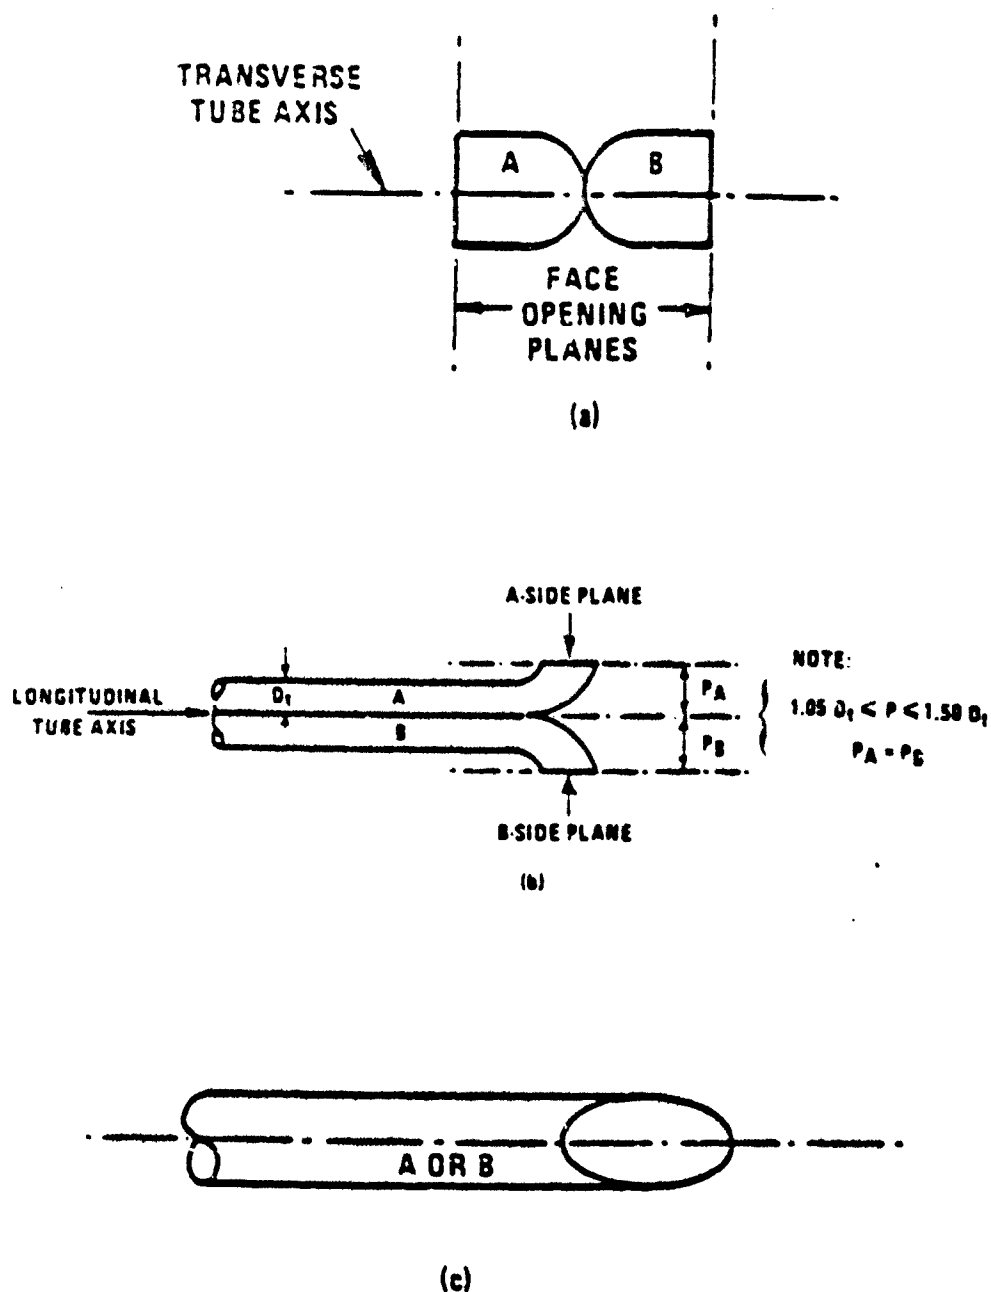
Properly constructed Type S pitot tube, shown in: (a) end view; face opening planes perpendicular to transverse axis; (b) top view; face opening planes parallel to longitudinal axis; (c) side view; both legs of equal length and centerlines coincident, when viewed from both sides. Baseline coefficient values of 0.84 may be assigned to pitot tubes constructed this way.
